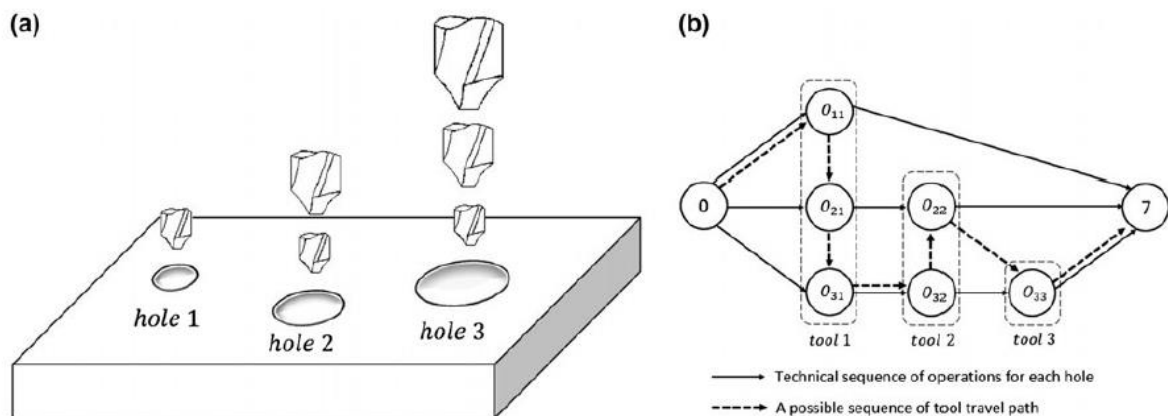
Multi-tool hole drilling with known tool-hole operations [13]
